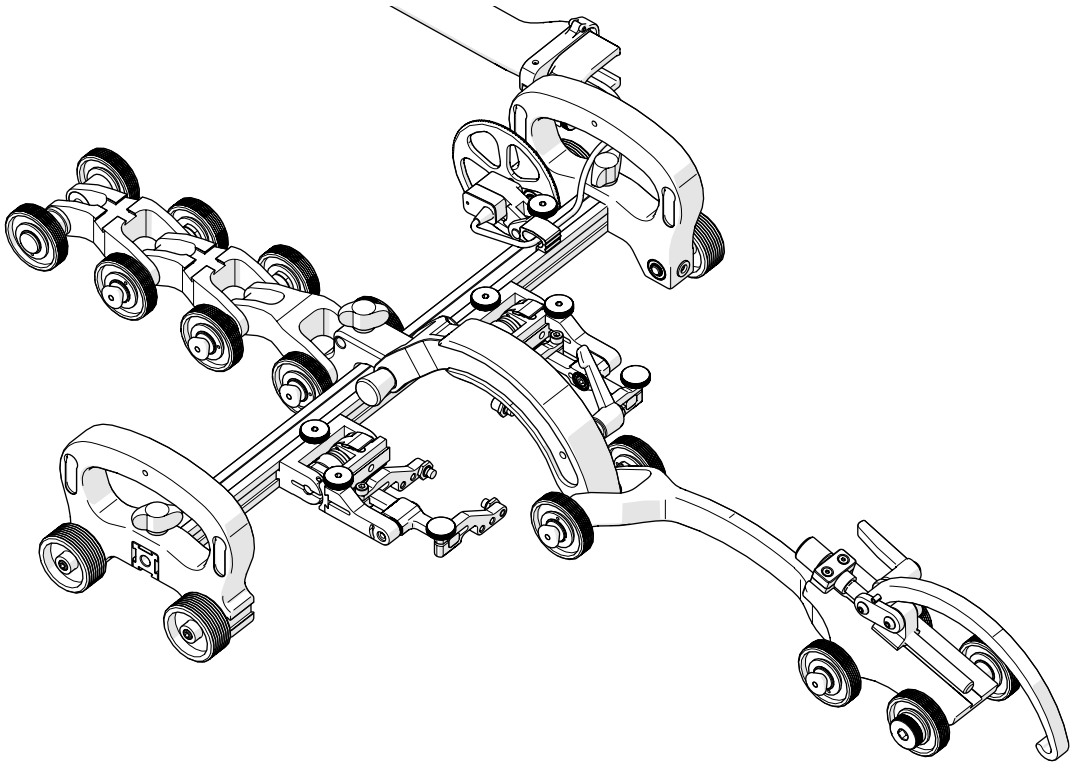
ROTIX - High Temperature Weld Frame Scanner
